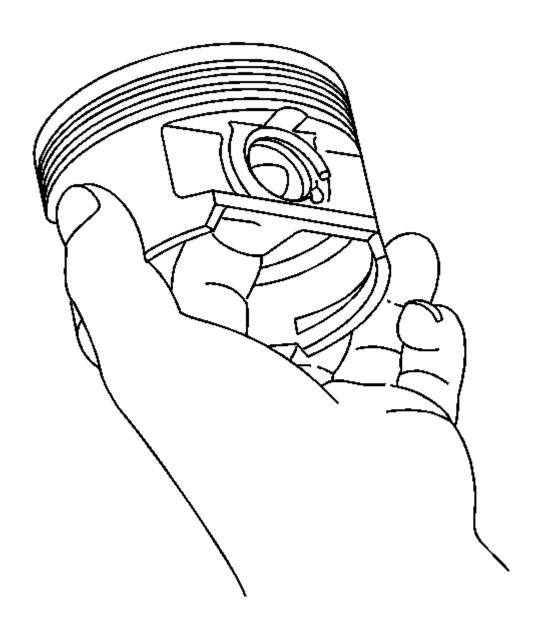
View Of Retaining Clip In Pin Bore Groove Courtesy of GENERAL MOTORS CORP.
